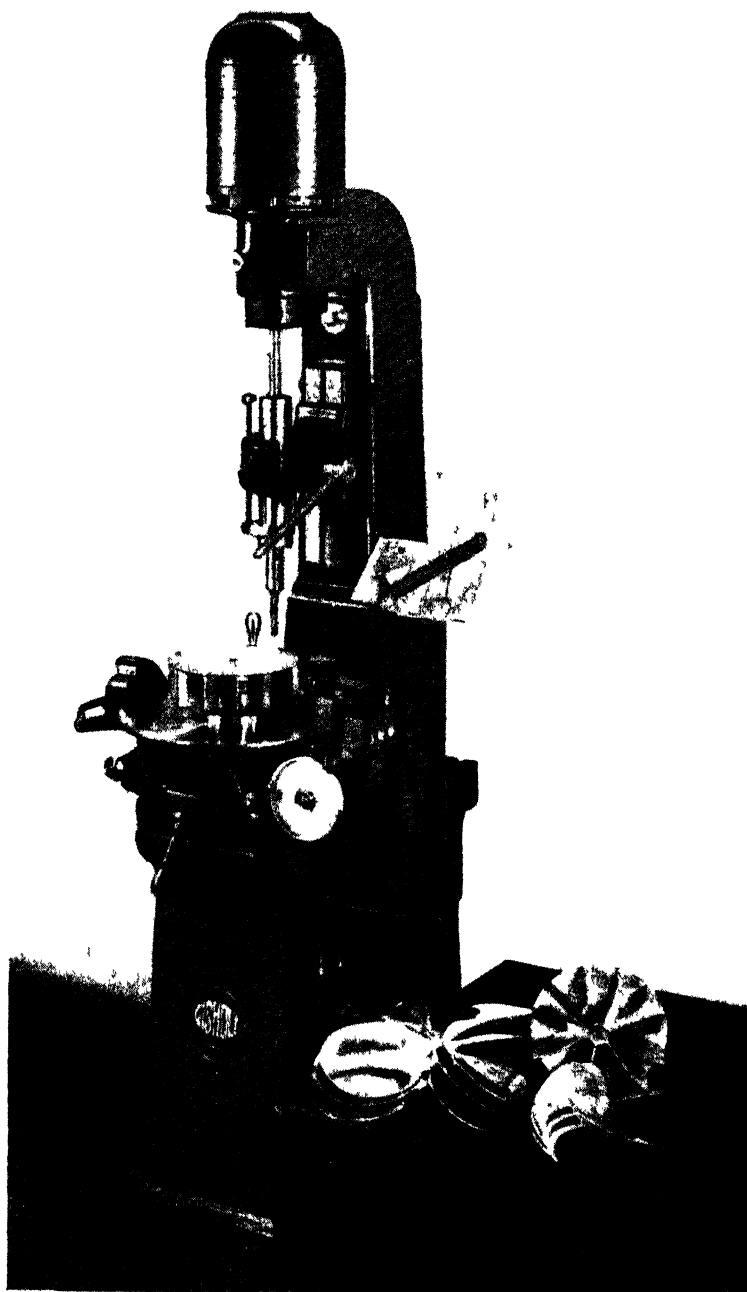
GISHOLT STATIC BALANCING MACHINES, SHOWN TESTING
